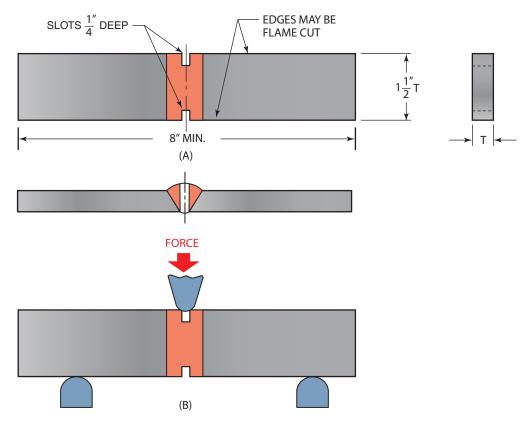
(A) Nick-break specimen for butt joints in plate. (B) Method of rupturing nick-break specimen.
